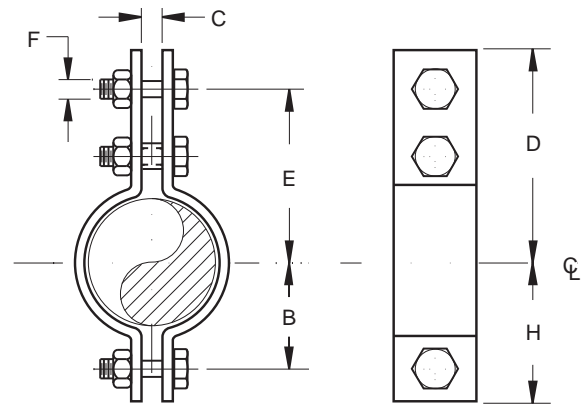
Z – HEAVY ALLOY THREE BOLT PIPE CLAMP
